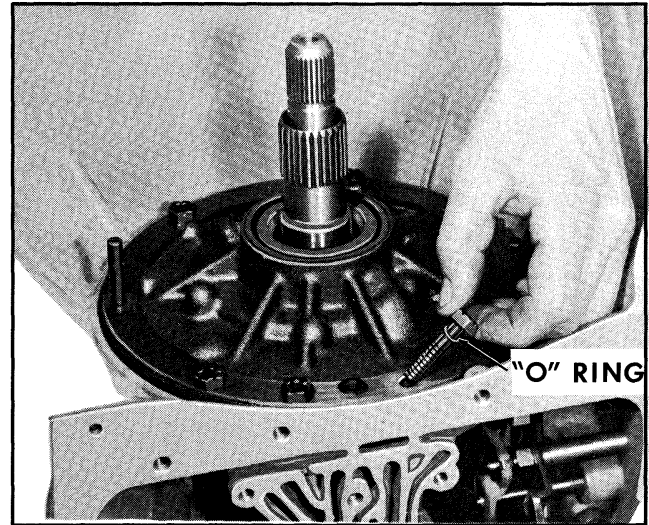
B-136 Installing Oil Pump Retaining Bolts
